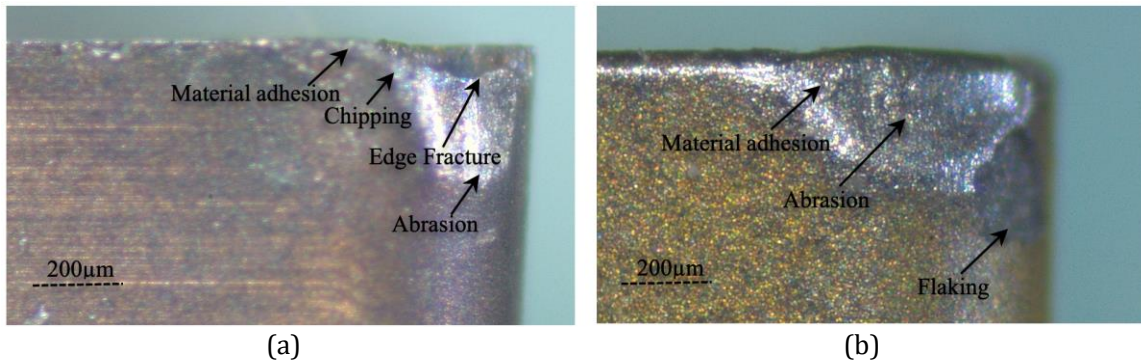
Microscopic view of tool flank wear at $V=300\text{m/min}$, $F=0.05\text{mm/rev}$ (a) PVD tools (b) CVD tool.
